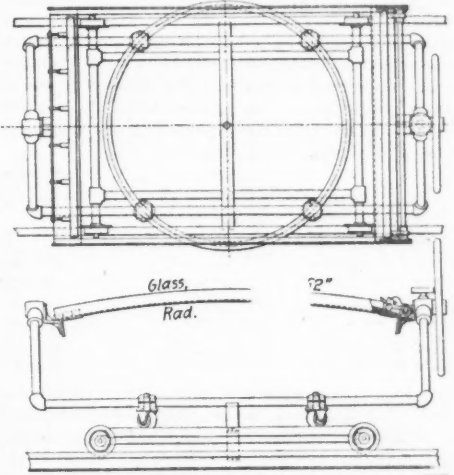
Plan and Elevation of Curved Glass Blue-Printing Frame.
